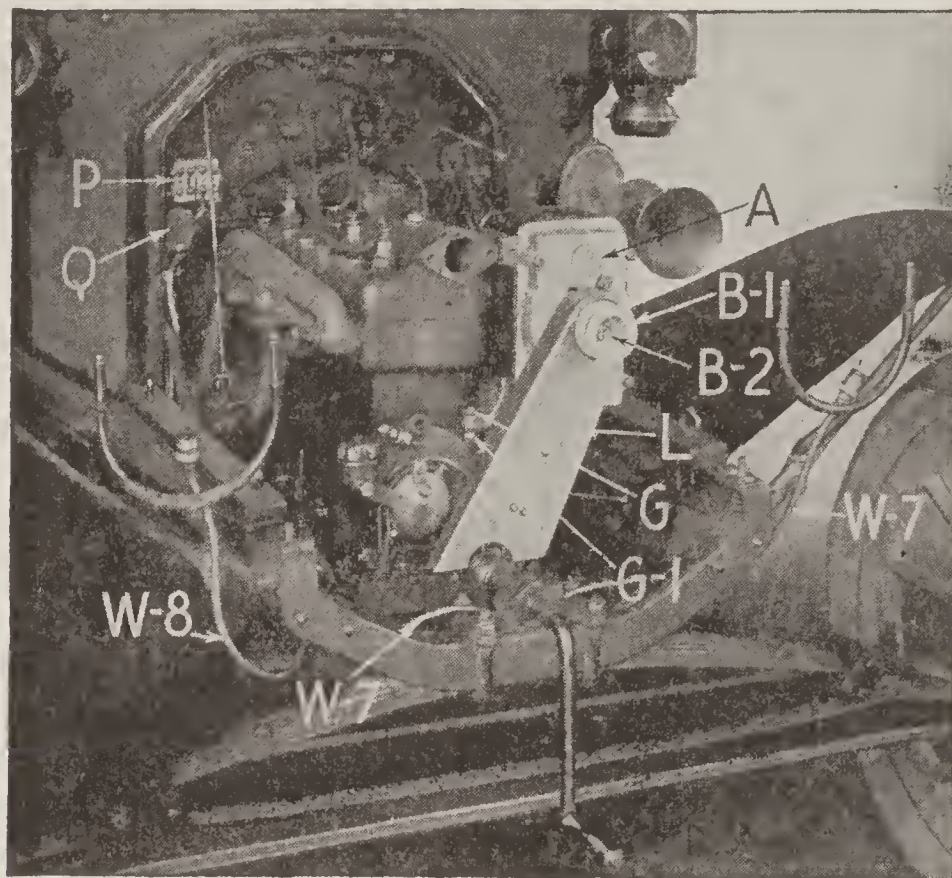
View of Westinghouse Installation, Showing Chain Guard and Part of Wiring Arrangement
